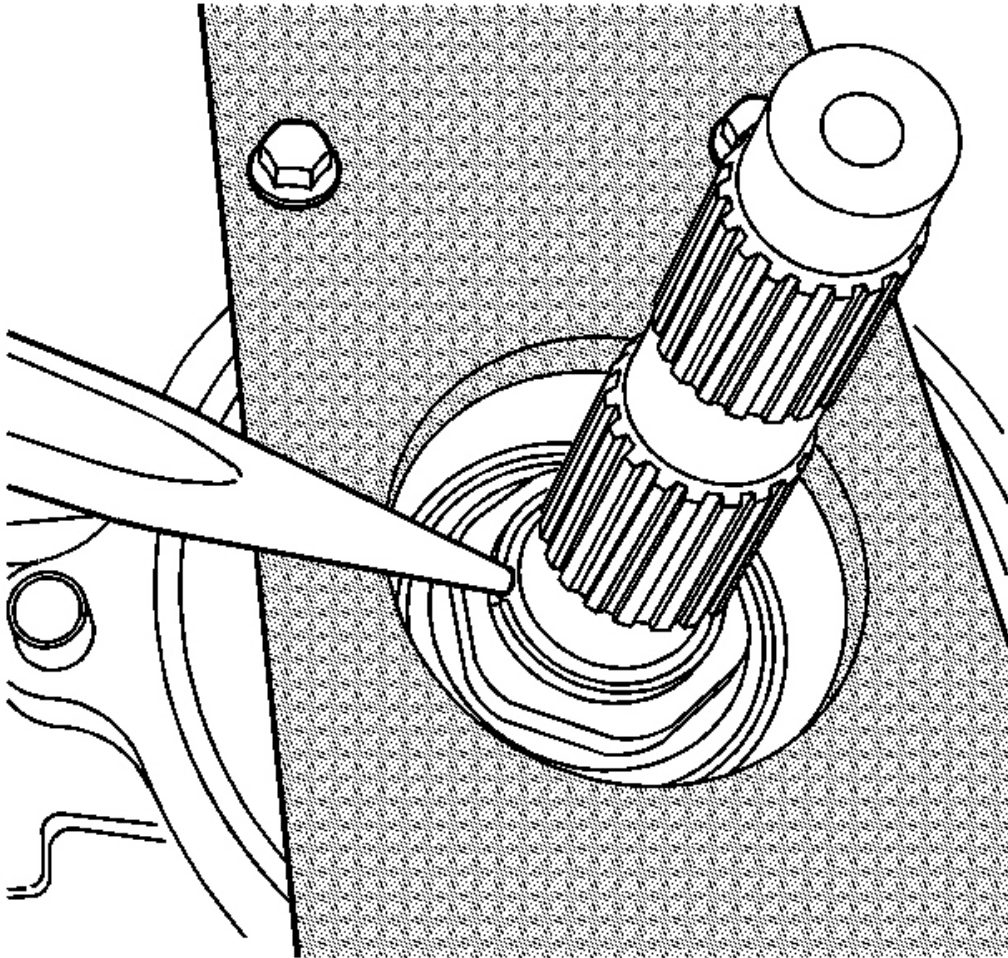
Using Punch Bend Out The Flat On Both Sides Of The Pinion
